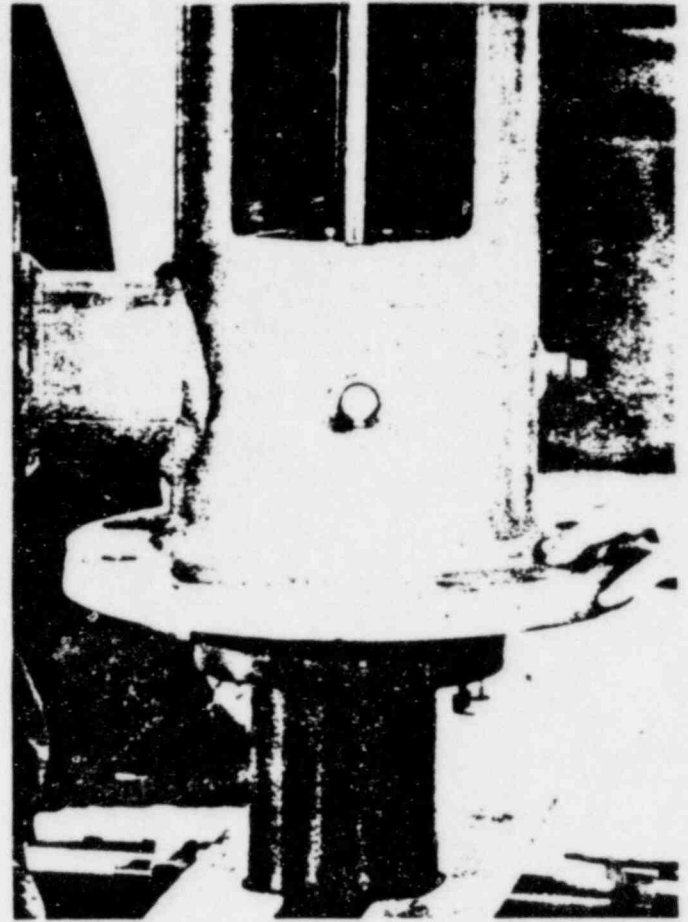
INSTALLING THE DISCHARGE HEAD
